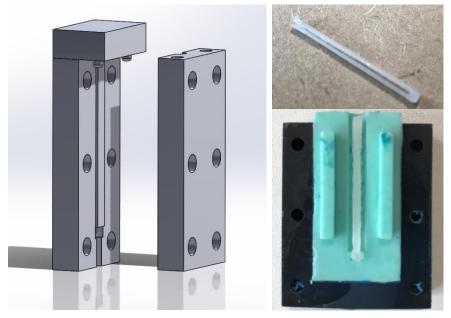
Wax Insert Mould (Left) & Developed Wax Insert (Right)
